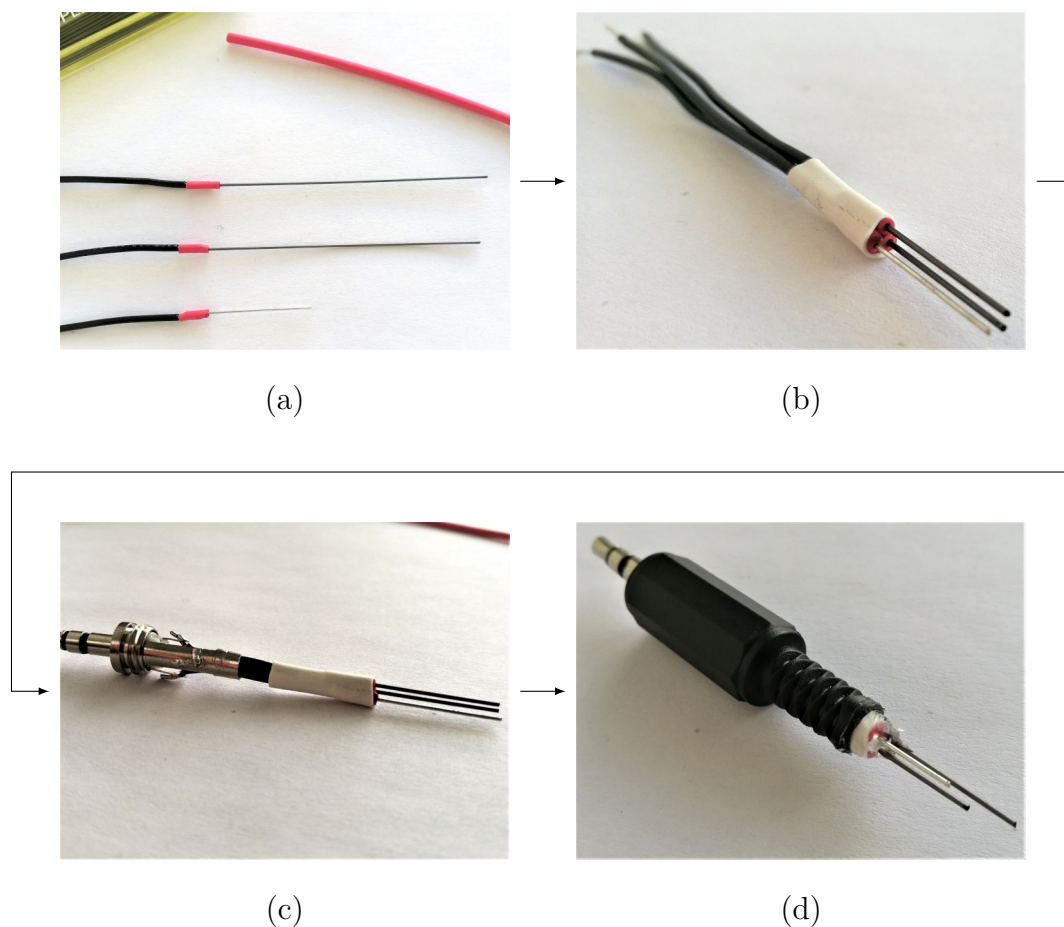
Needle-shaped sensor assembly process: mechanical pencil leads and Pt wire connected to soldering wire through heat-shrink tubes (a), joint together (b), soldered to audio jack connector (c), closed and cut to length to form the complete sensor with integrated audio jack connector for point-of-care applications (d). Reprinted with permission from [98]. © 2020 IEEE.
